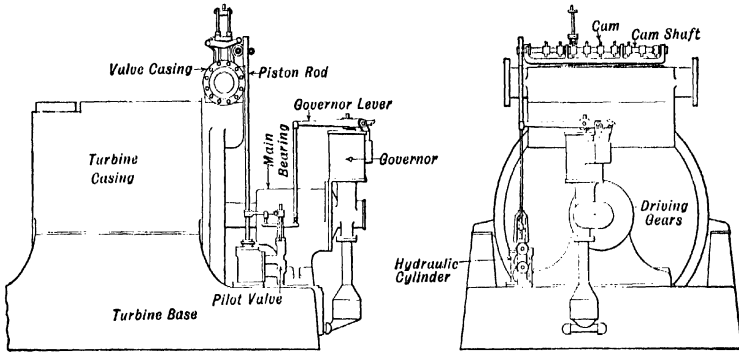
Arrangement of Hydraulic Valve Gear on Horizontal Curtis Turbines.
